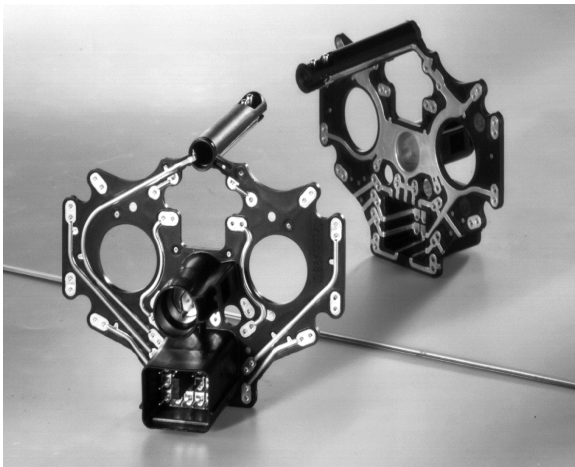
PCB-Connector for Brake Modules (Automotive) (PA)
